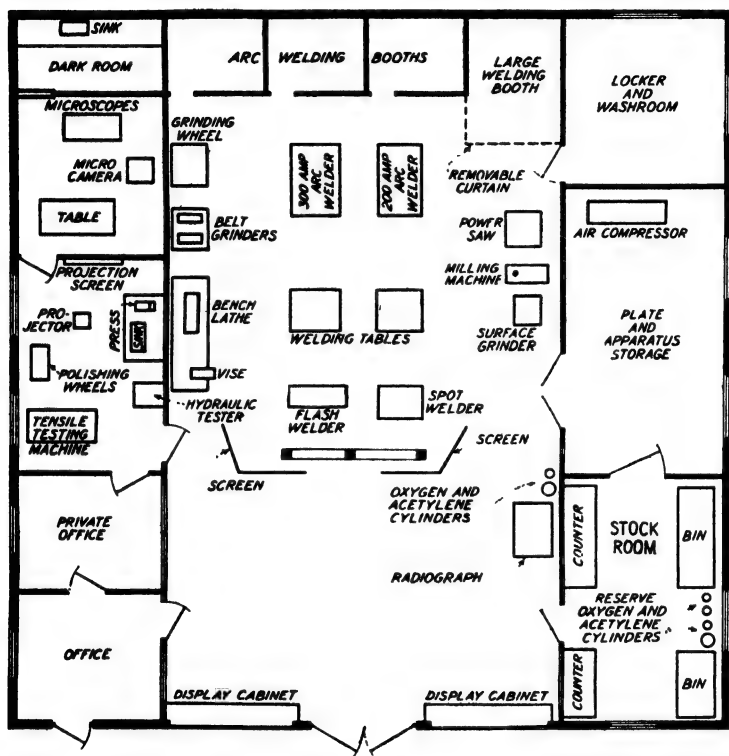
This includes several kinds of welding apparatus and some machine tools.
